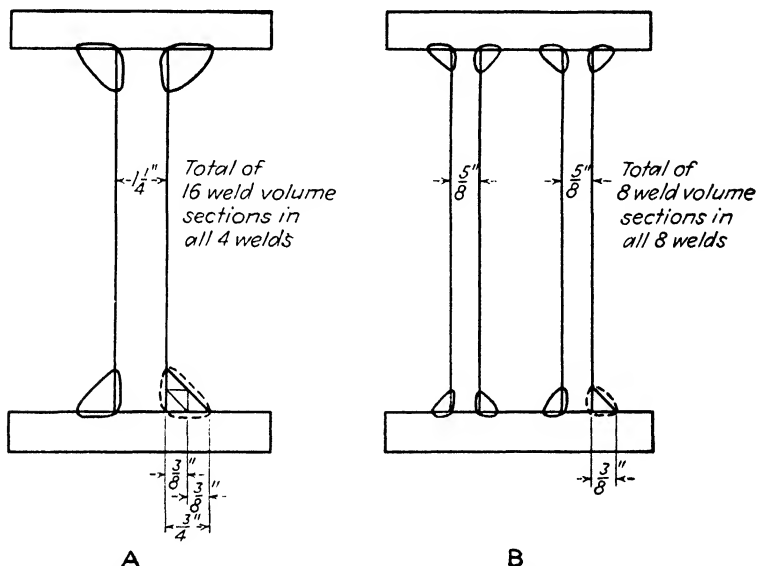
Fundamentals of welding design, especially a knowledge of relative strength of welds, should be widely known in a welding organization. In this case, the total web sections in *A* and *B* are equal in strength, but only one-half the weld metal (and time and cost of welding) is used to fuse the total web section in *B* as required in *A*, each welded to a comparable strength.
